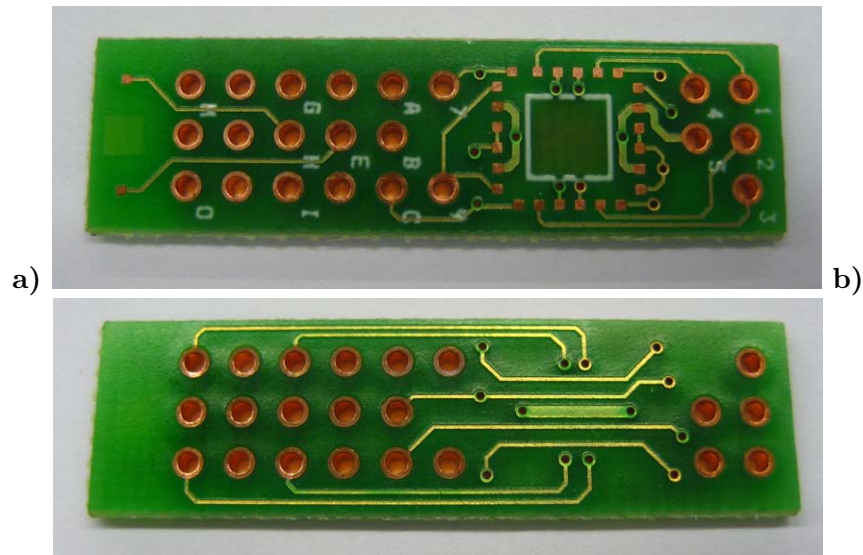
Custom designed PCB base a) front view with visible pin-out, b) rear view.
